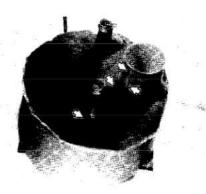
Magnetic Rubber Indications of Surface Cracks In Aircraft Fastener Holes (Produced by Yoke Magnetization DC Continuous)
